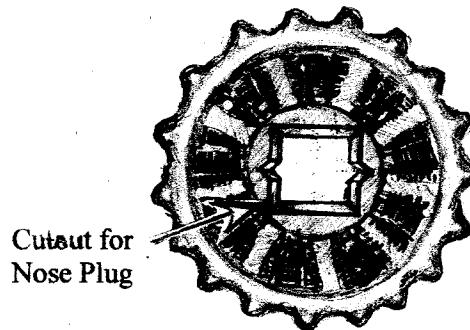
View looking aft at the cutout in the model's nose where the Nose Block Assembly plugs in. Note the two small wedge-shaped cutouts, one on either side of the main cutout. These are necessary for the retention device to fully expand once inserted.
